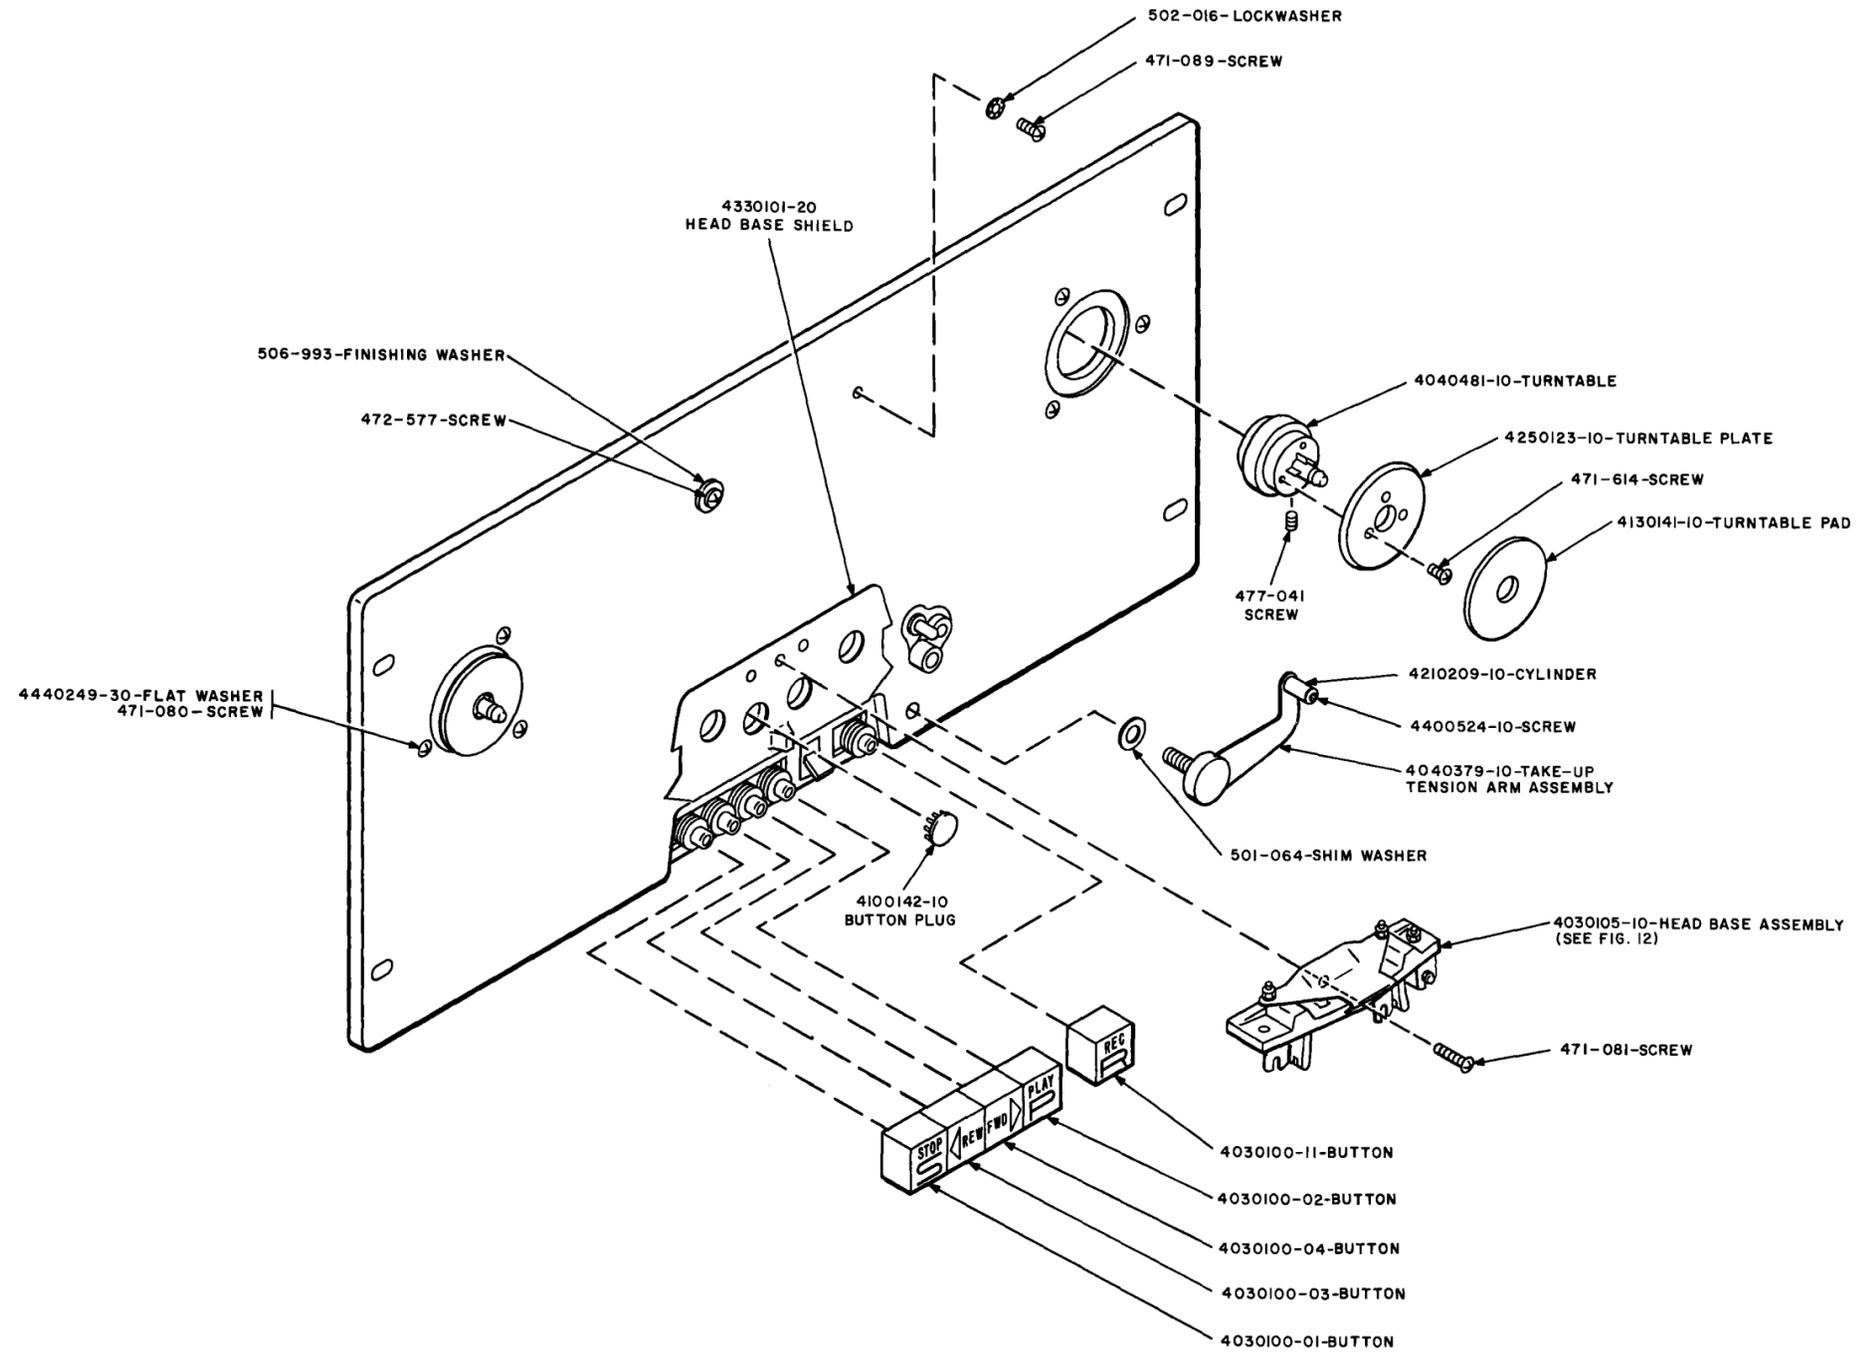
Record-Reproduce Mechanism—Removal of Head Assembly, Turntable, and Miscellaneous Parts
